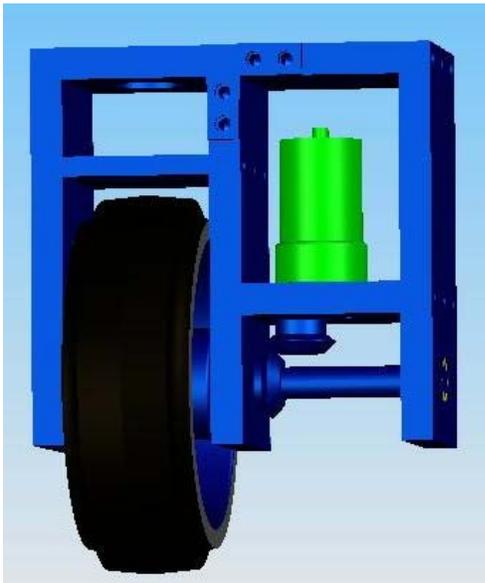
Solid model CAD of Gnuman's wheel assembly.
